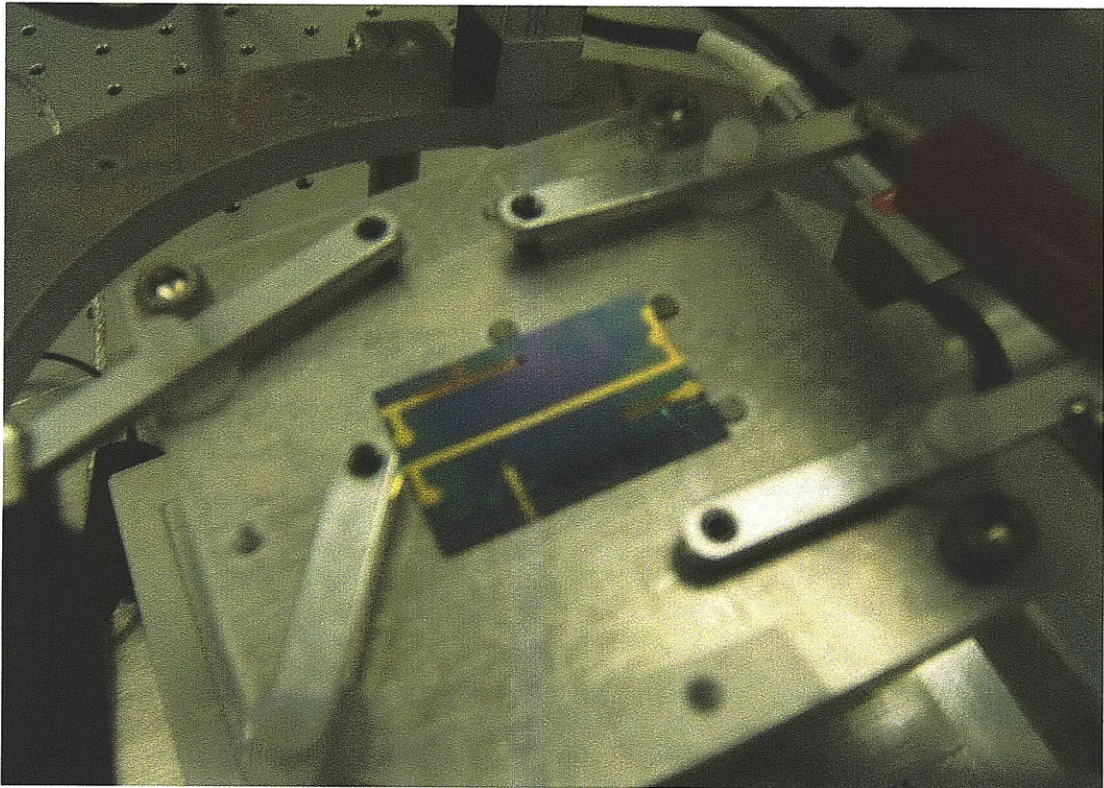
The bottom coupon aligned to the mounting plate using the three alignment pins on the mounting plate.
